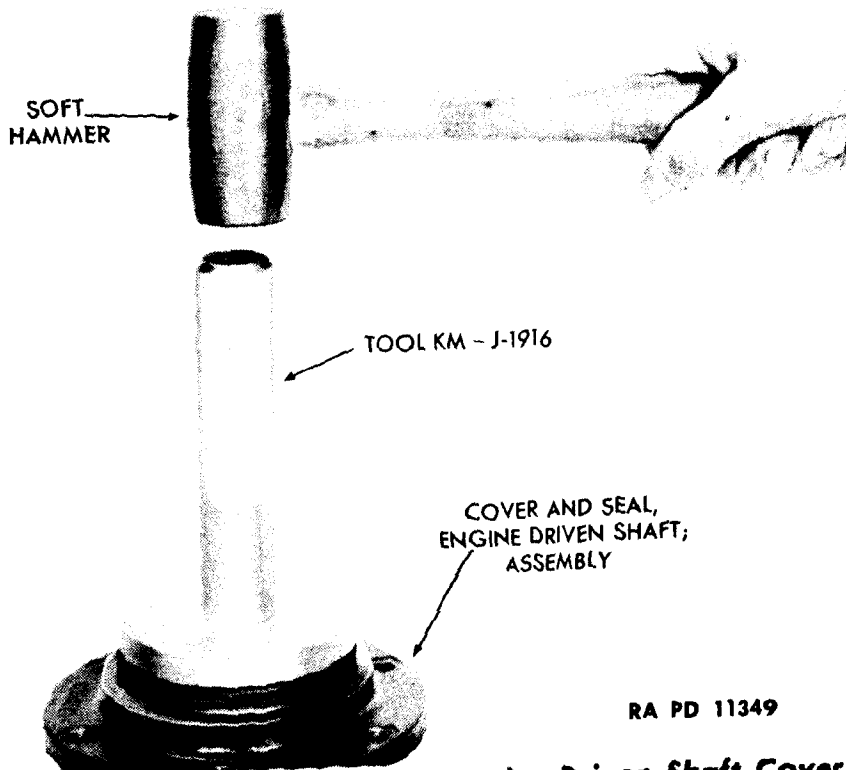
Installing Oil Seal on Engine Driven Shaft Cover
